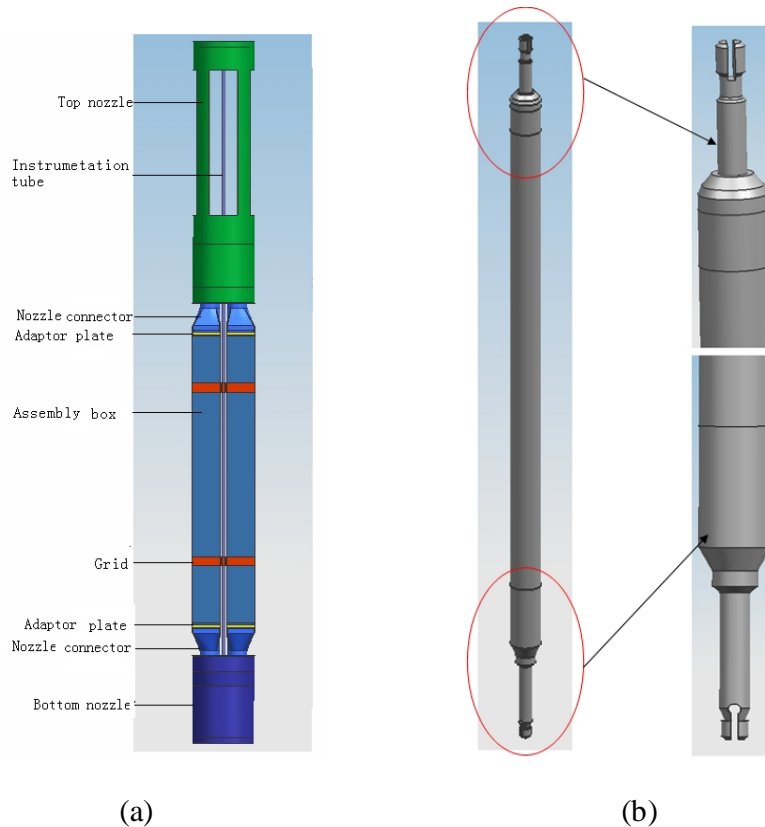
The illustration of fuel assembly cluster (a) and fuel rod (b)
